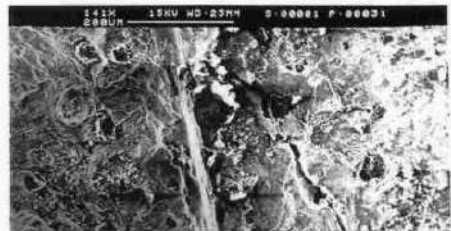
Fractograph of the failed crankshaft shows a number of secondary cracks and porosities (f-g).
